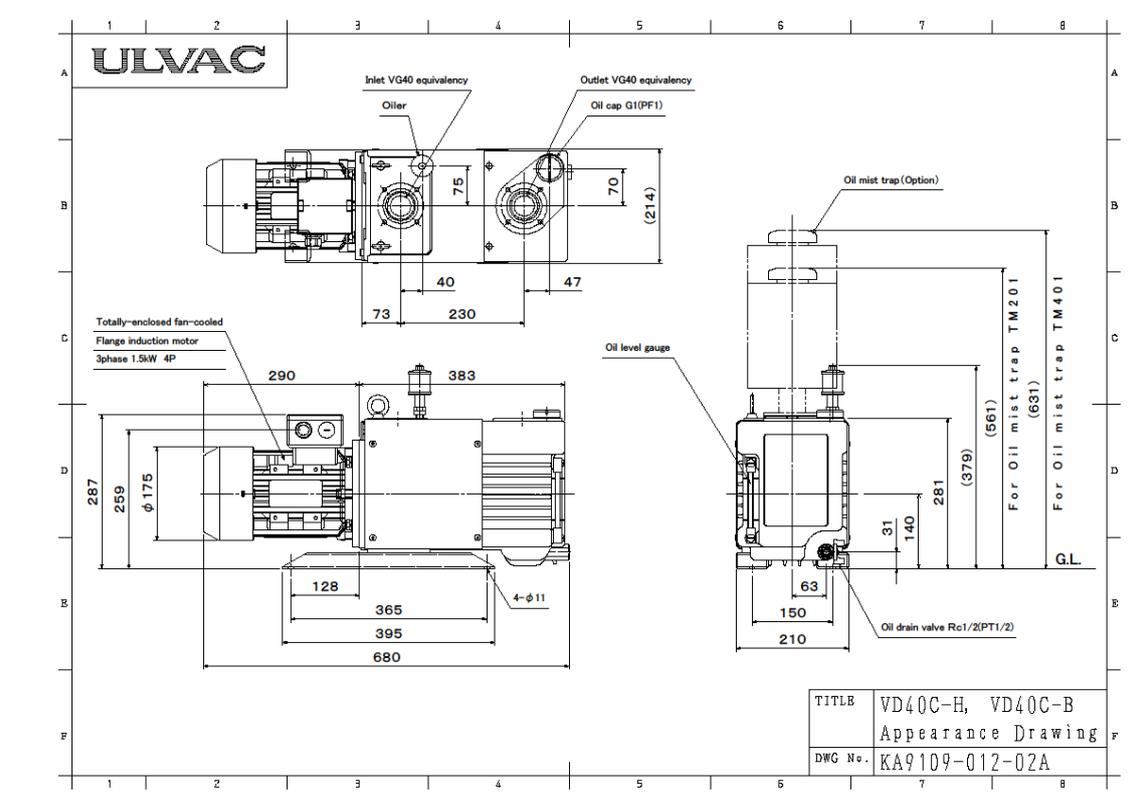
Dimensional drawing VD40C-H, VD40C-B
